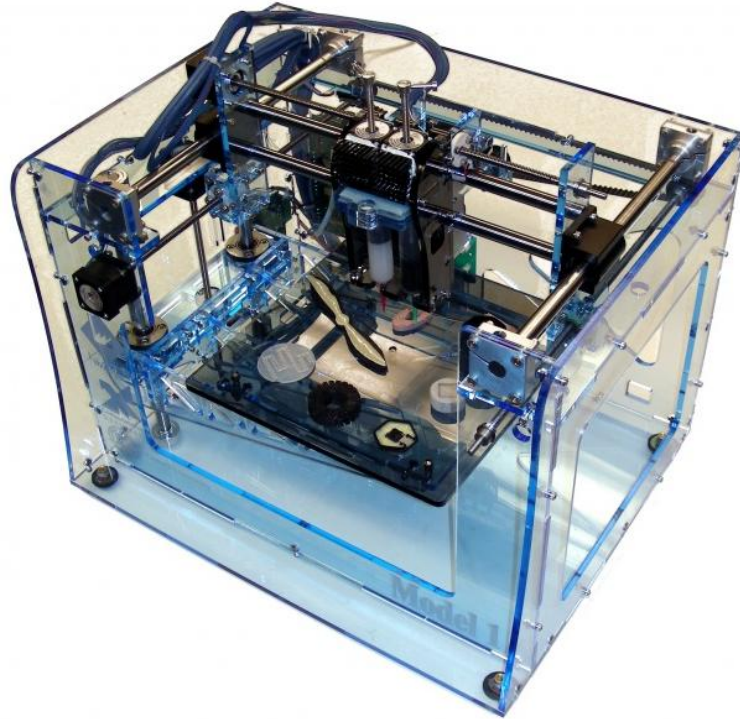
Fab@Home Rapid Prototyper with several example fabricated parts on the stage
